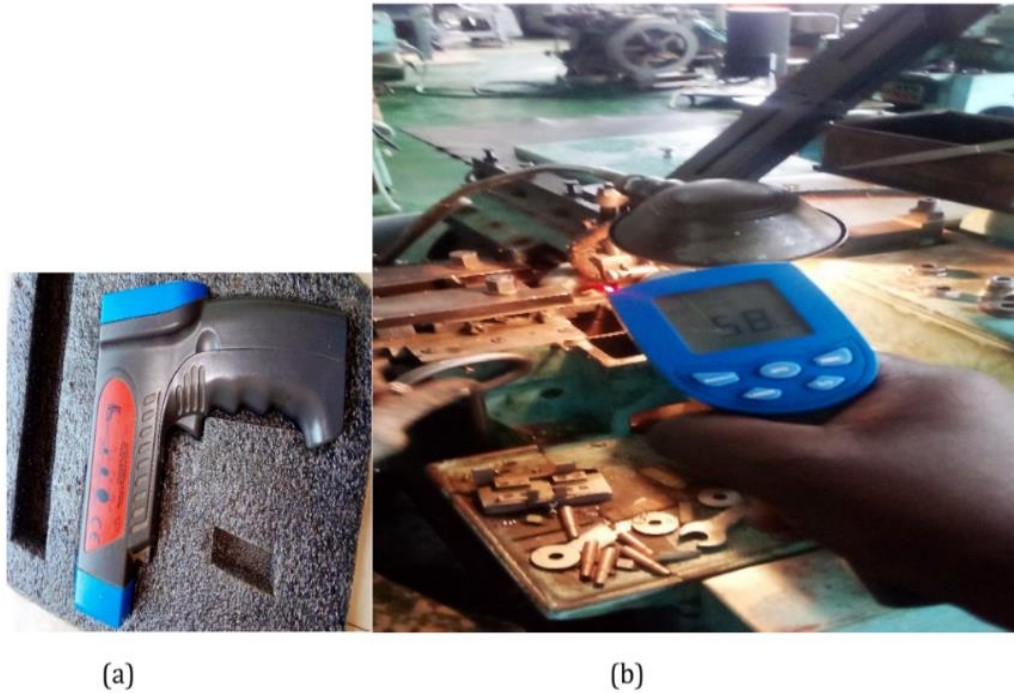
(a) Infra-red thermometer, Euro Lab 1250 and (b) Measuring cutting temperature at workpiece-tool interface
